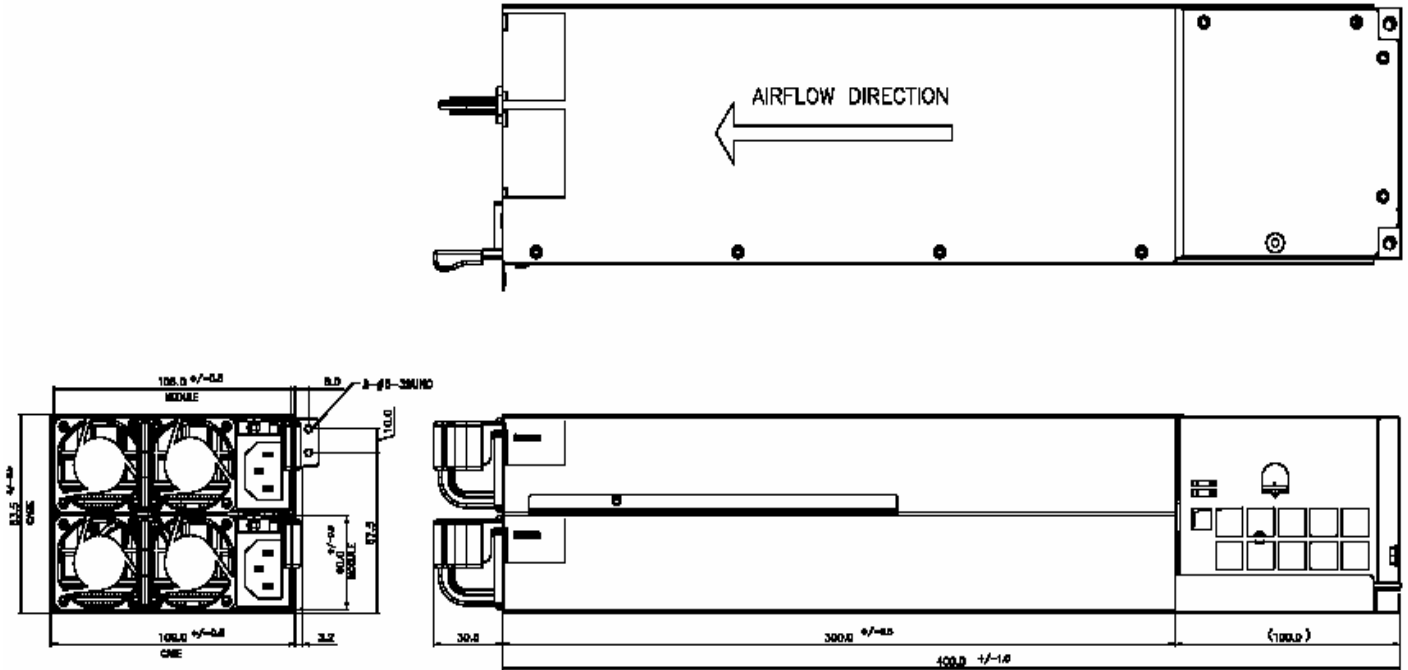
Intel® Storage System SSR316MJ2 Power Supply Assembly Drawing
